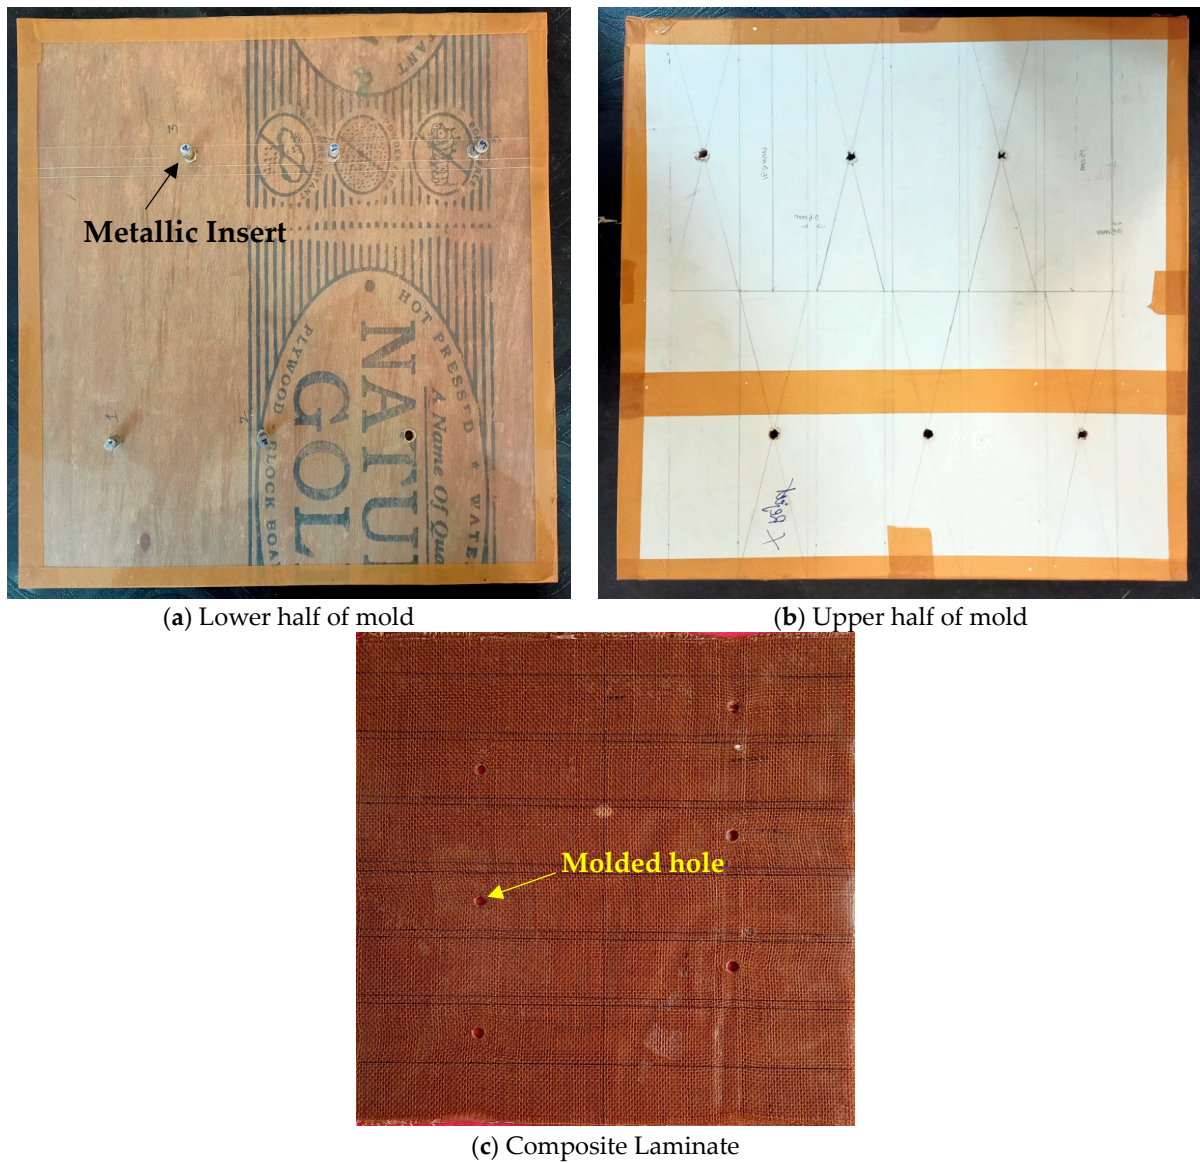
(a) Lower half of mold (b) Upper half of mold (c) Composite laminate with molded holes.
